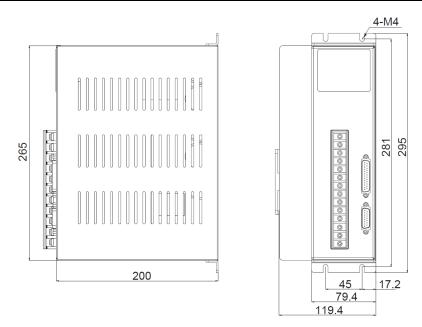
SD300-75 & SD300-100 installation dimensions
